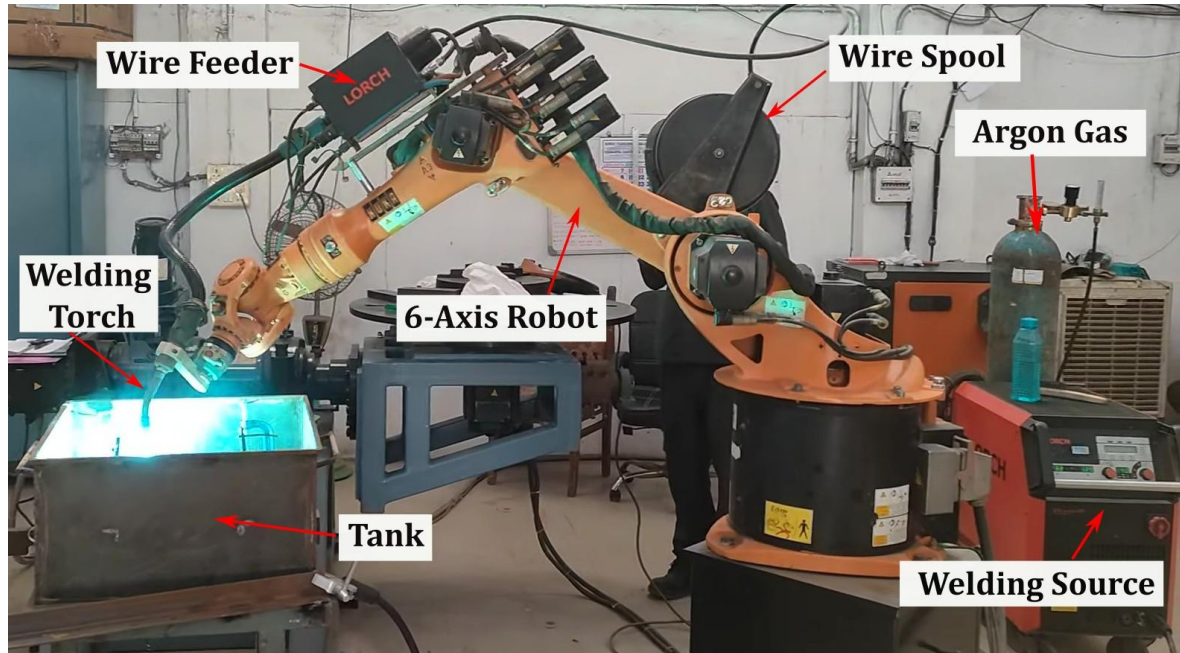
Experimental Setup depicting various equipment used for this investigation
